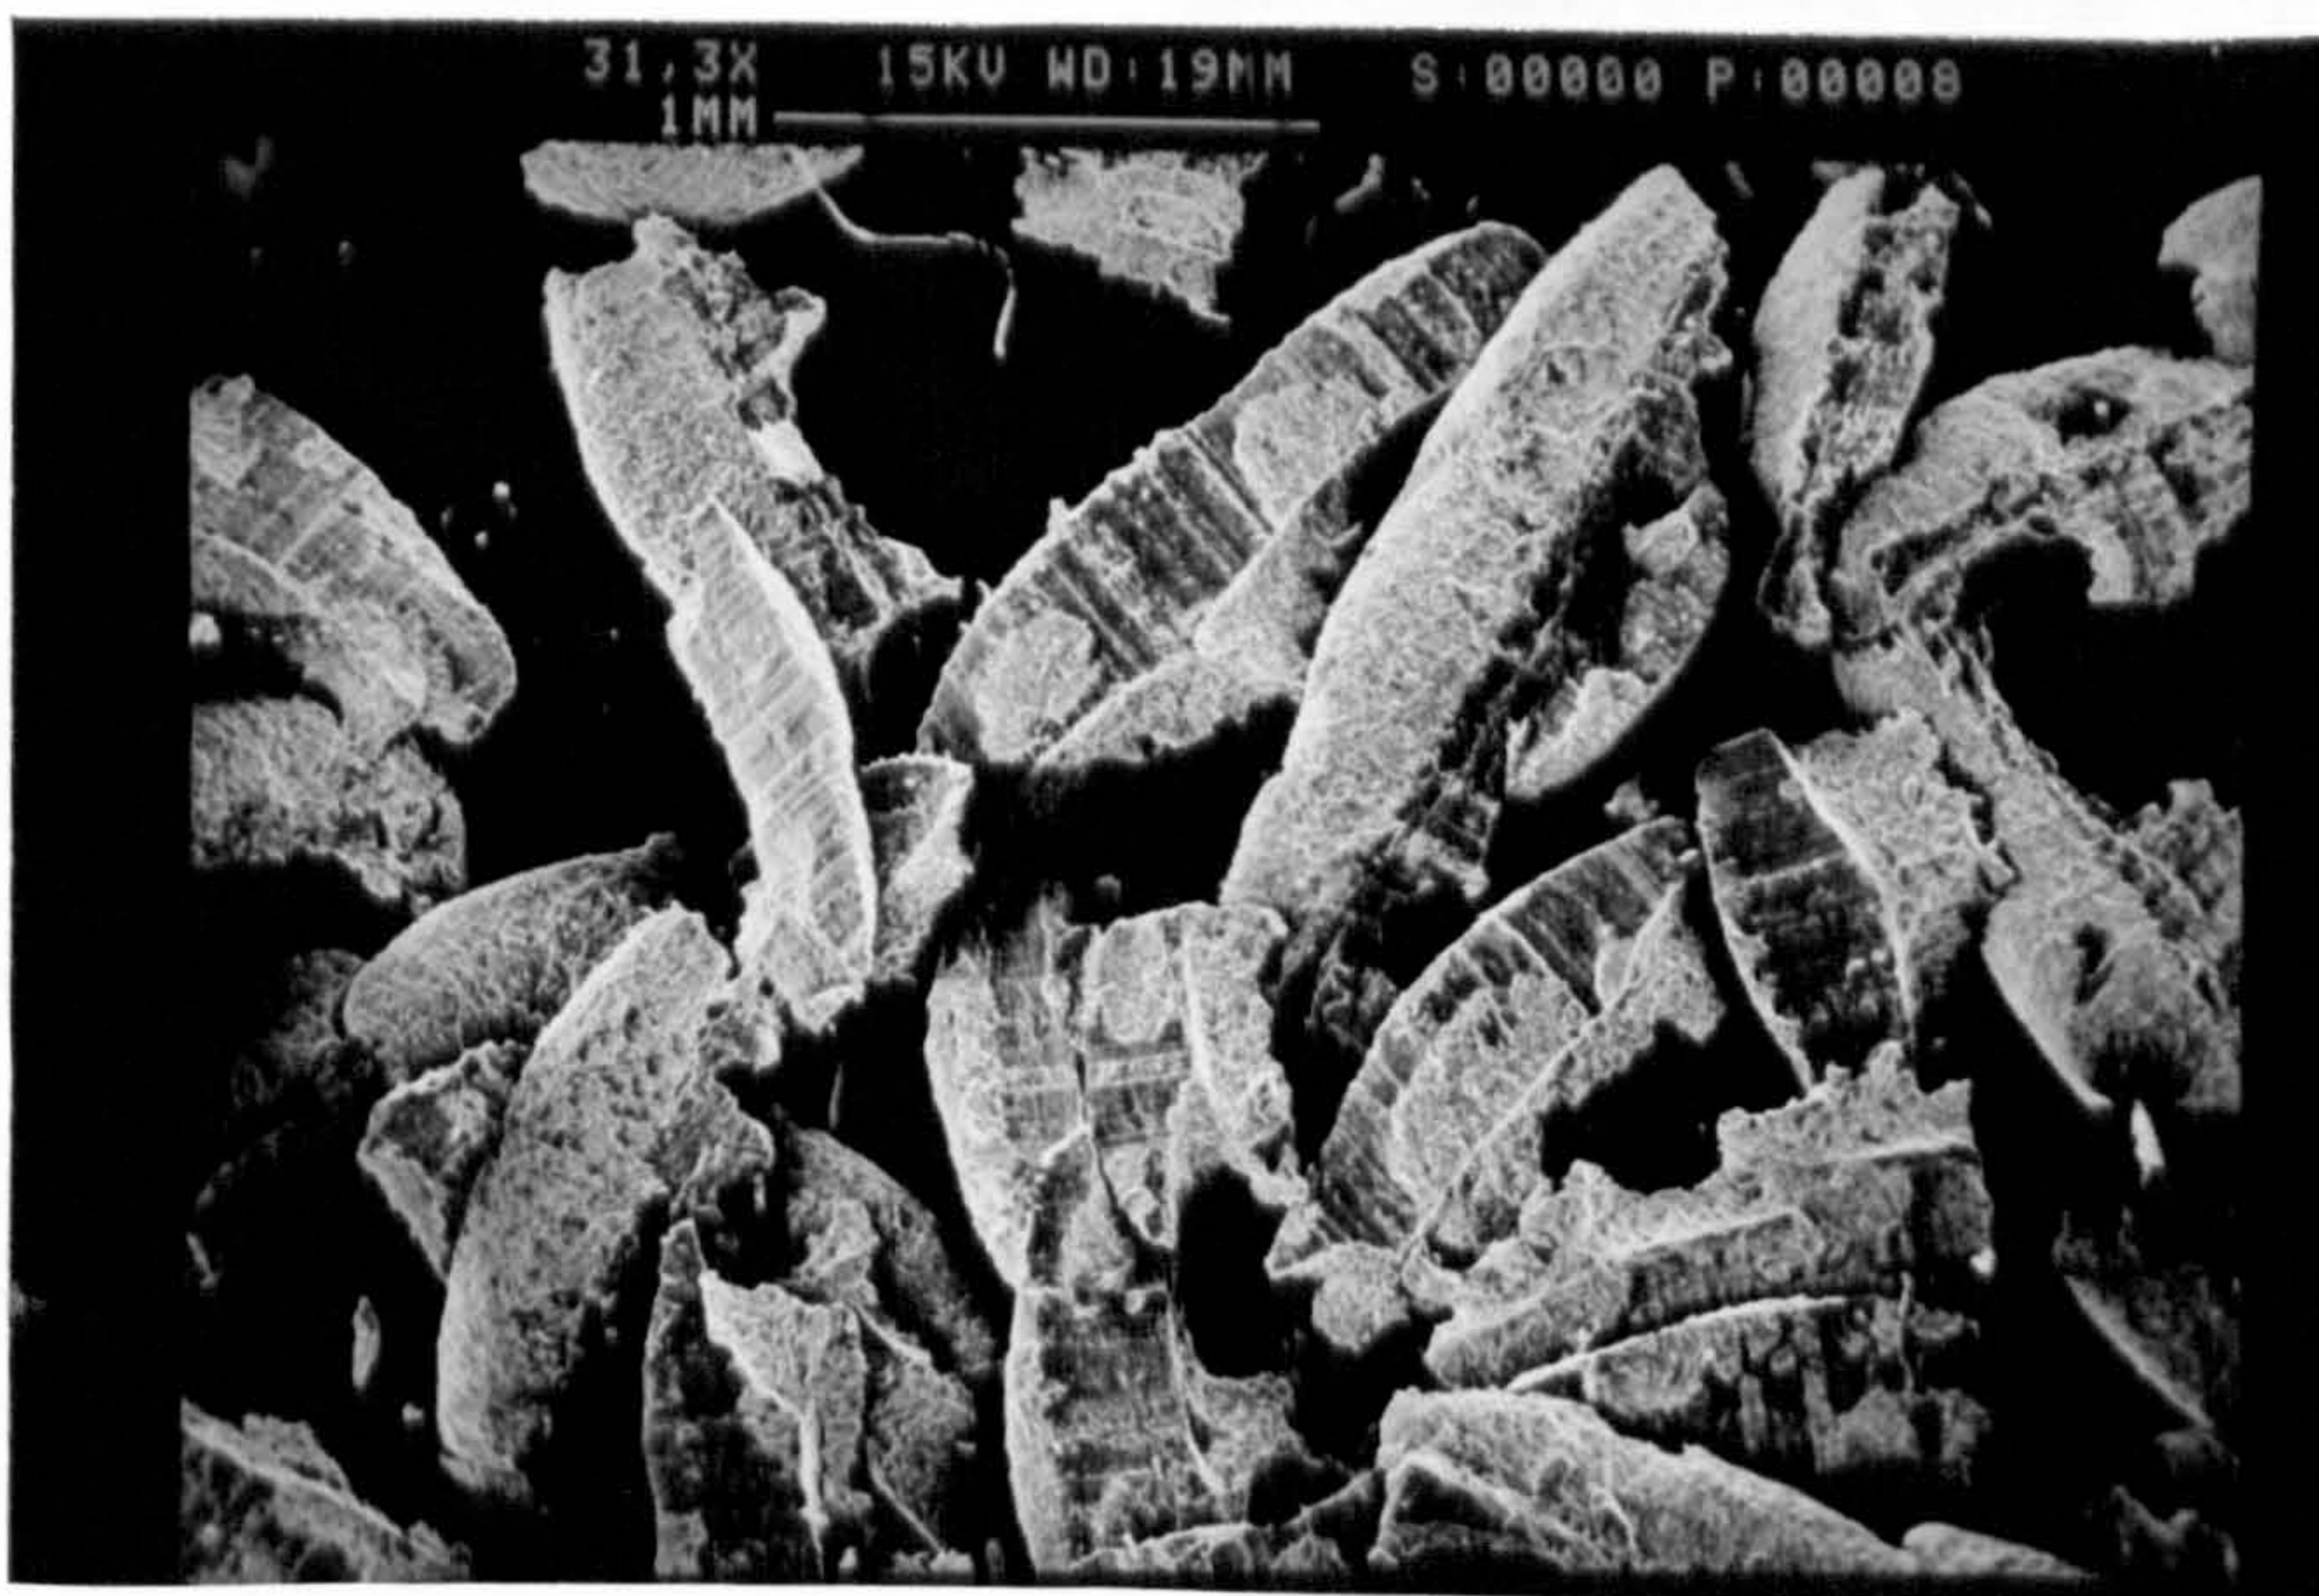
Discontinuous PVC chips showing fractured surfaces
